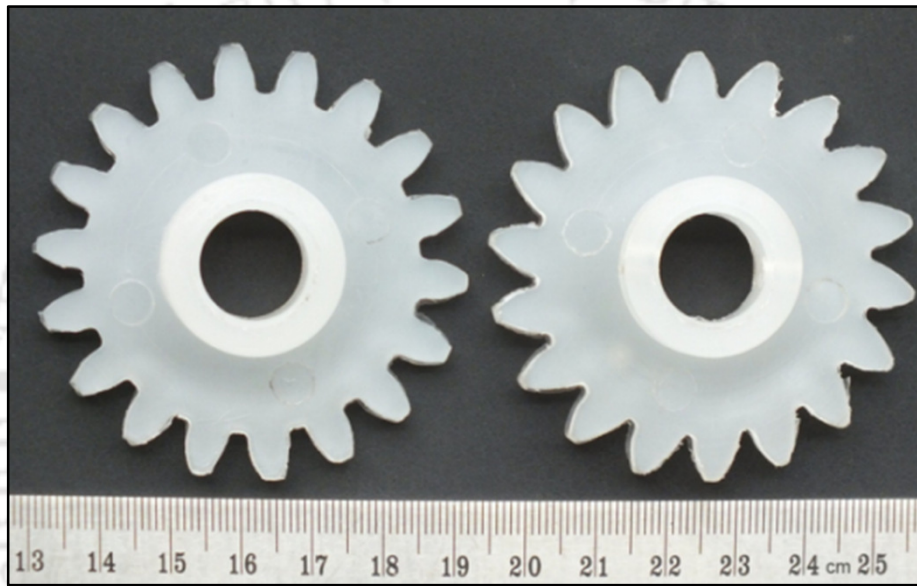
Injection-moulded symmetric and asymmetric test gears
